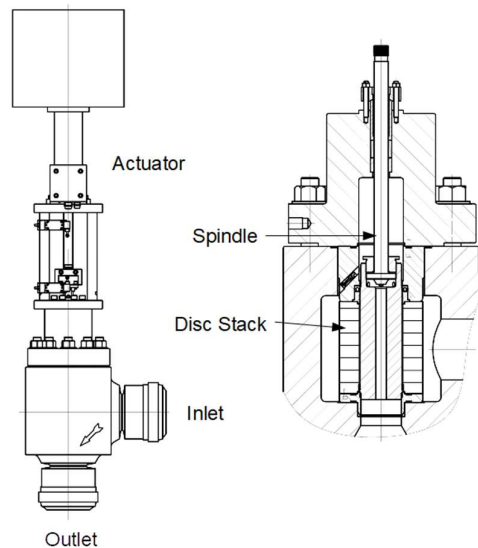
Modulating valve type section drawing (Desensitised from undisclosed source)
